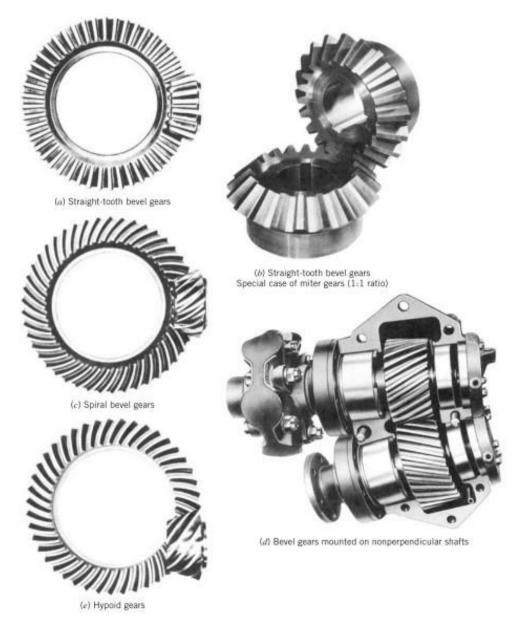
Types of bevel gears. (a, c, d, e, Courtesy Gleason Machine Division. b, Courtesy Horsburgh & Scott.)<sup>39</sup>
